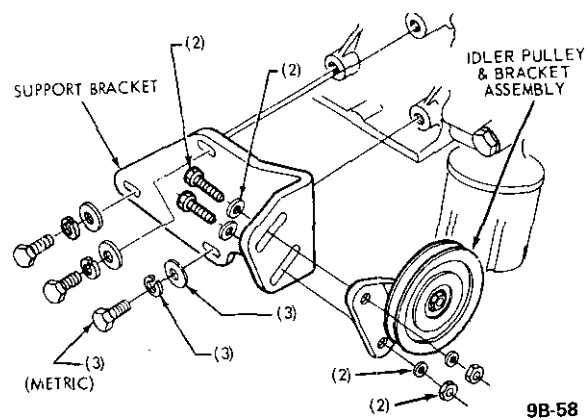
B-81 Idler Pulley and Bracket Assembly and Support Bracket GT
